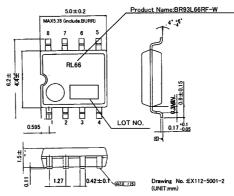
(d) PHYSICAL DIMENSION SOP8(BR93L66RF-W)
